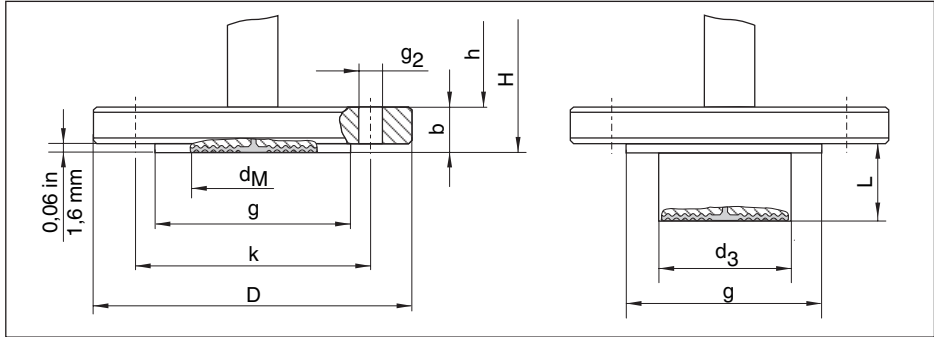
Process fitting VEGADIF 65 with single-sided chemical seal, plus side ASME flange with and without extension, 316/316L
